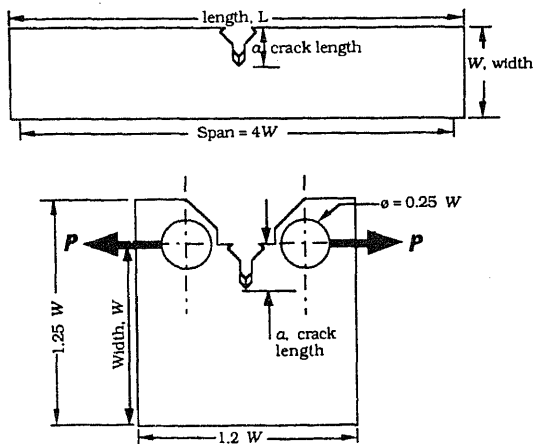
Popular fracture mechanics test specimen geometries. (a) Three point bend specimen; (b) compact tension specimen.
